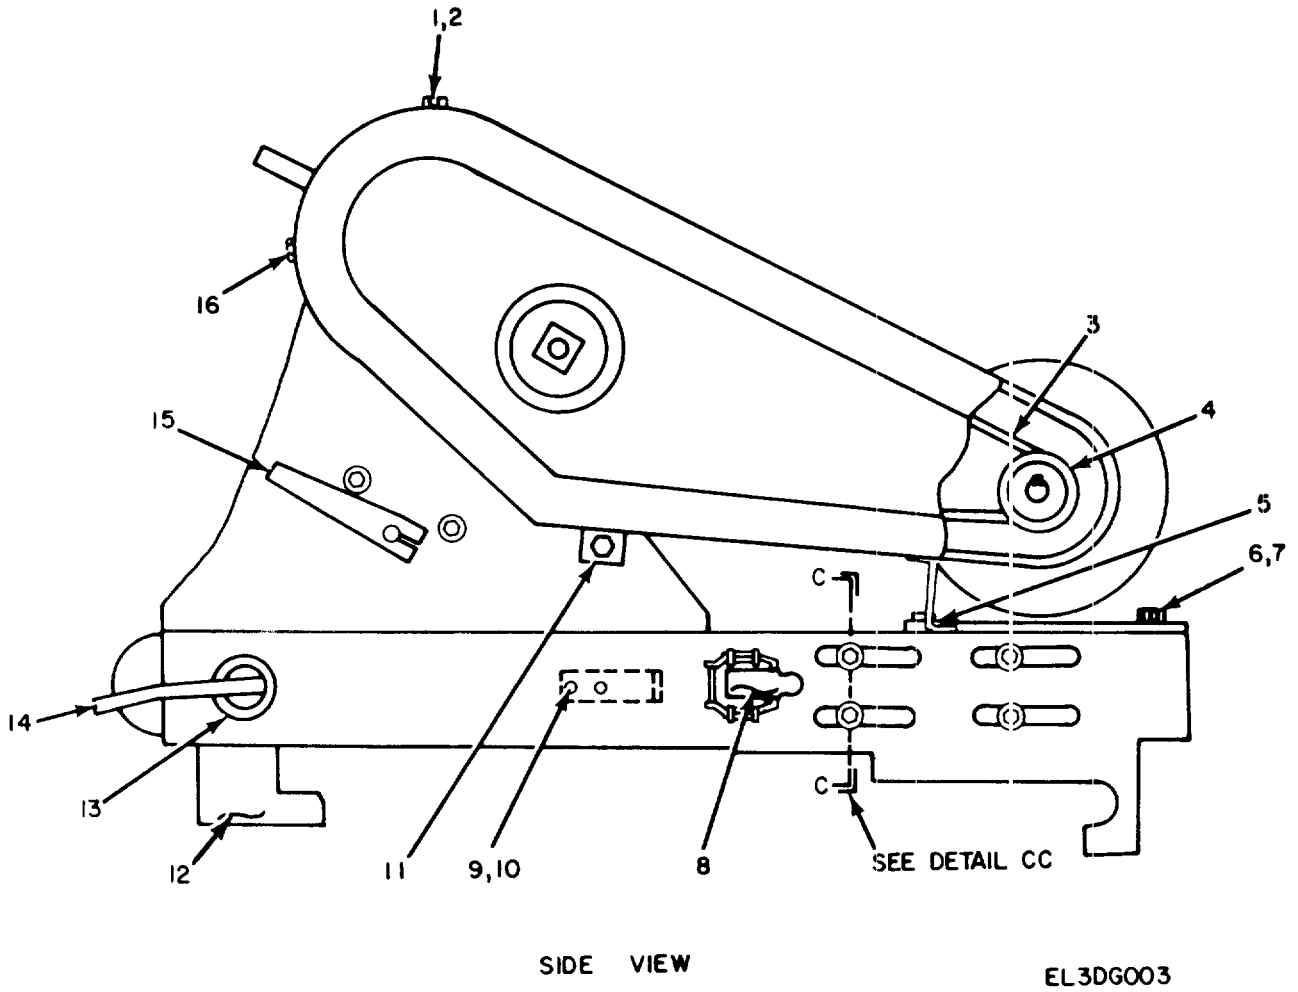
Reeling Machines, Cable, Motor Driven RL-172/G and RL-172A/G (Sheet 1 of 3).
